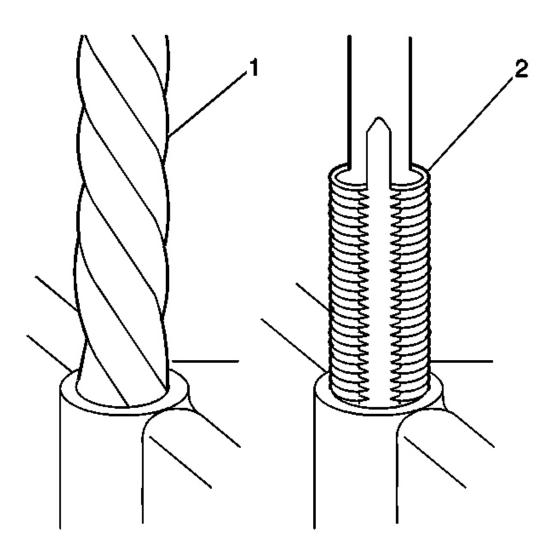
Drilling & Tapping Threads Courtesy of GENERAL MOTORS CORP.
